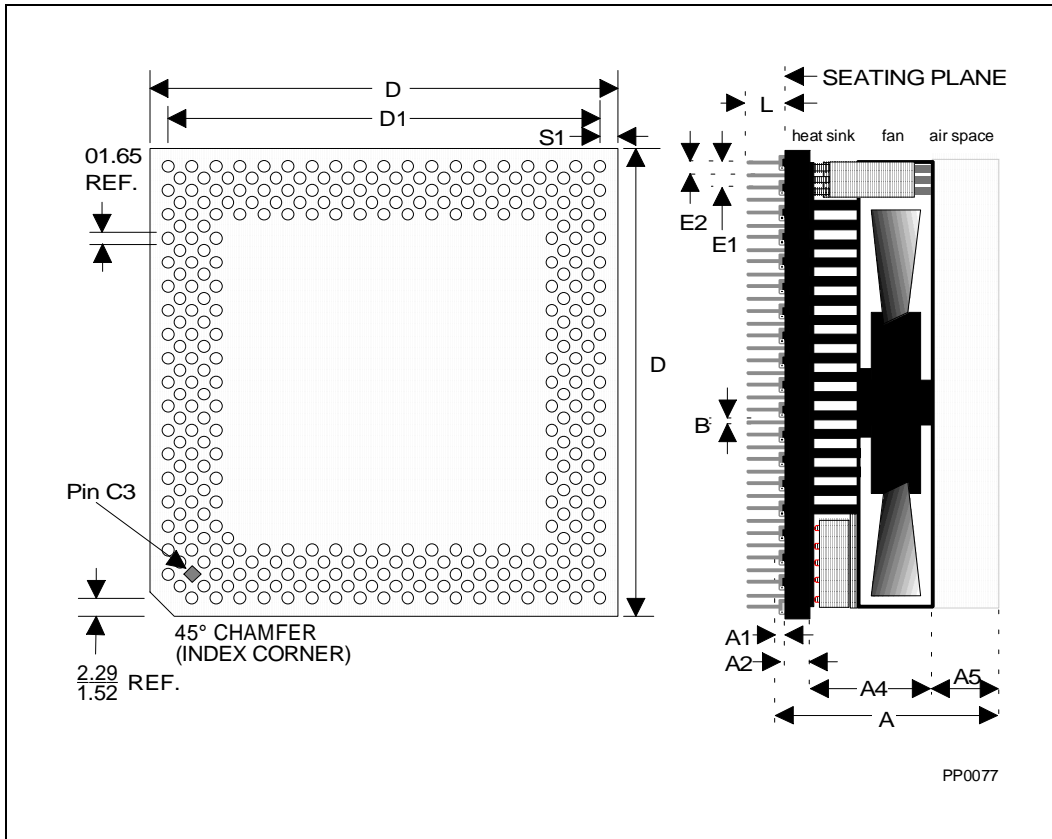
125/150/166-MHz Pentium® OverDrive® Processor Package Dimensions
